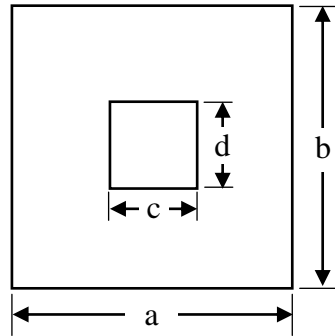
Dimensions of rectangular laminated hybrid composite plate with square cut-out.
